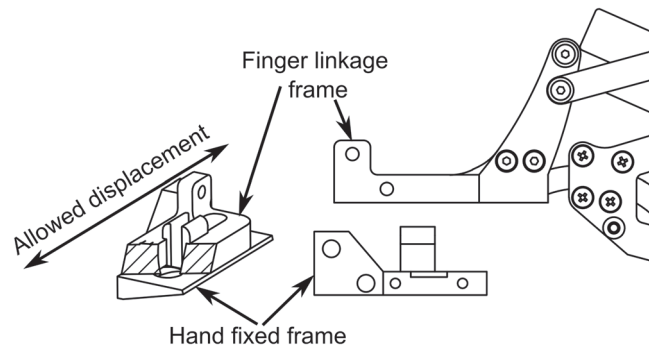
Hand-Exoskeleton fixing system. Left: Section that shows the wedge-like part inserted in the slot of the finger frame. Right: Detailed view of the connection system before attachment.
